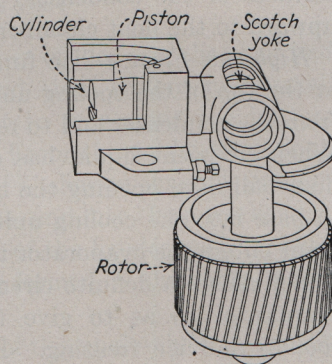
Yoke and cylinder construction for compressor shown in Fig. 44.
